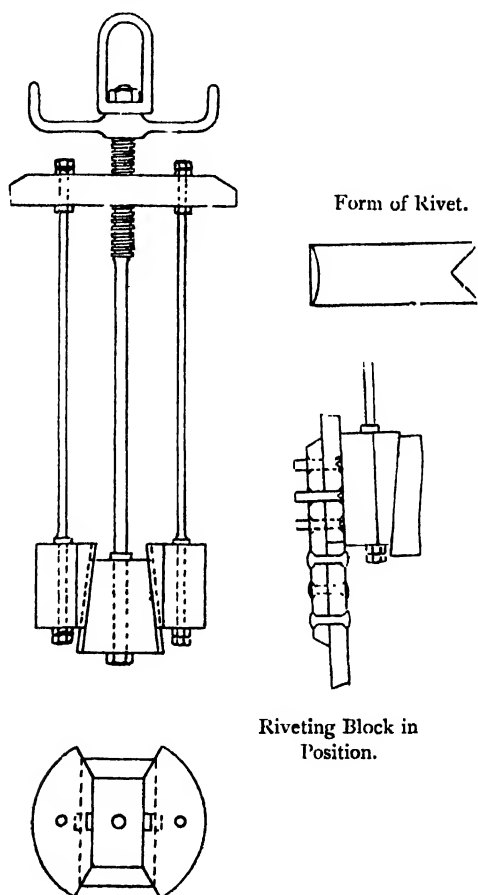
RIVETING BLOCK FOR RIVETING UP CASING.
